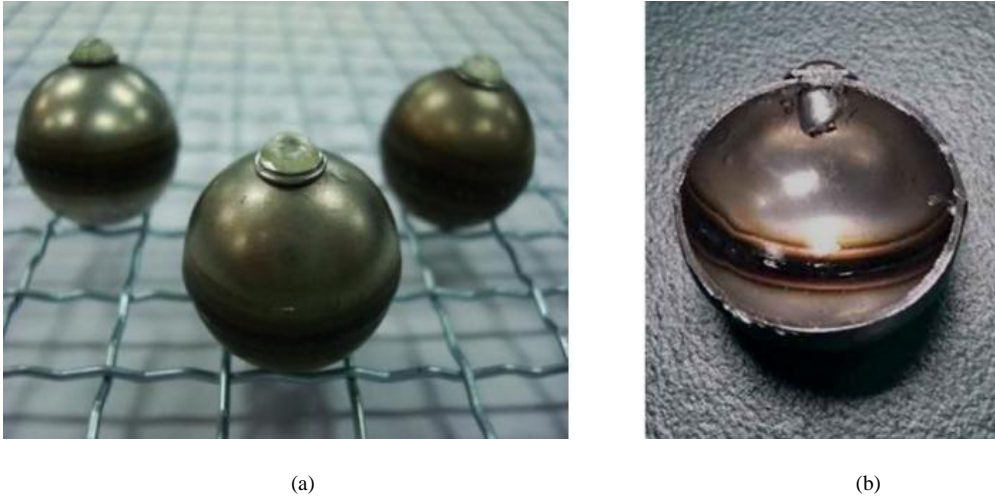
(a) PCM-HSB ball secured with rivet and epoxy (b) Cut section of HSB (115)
